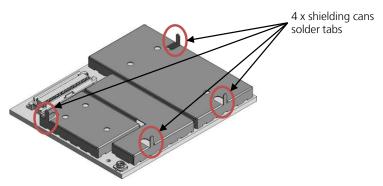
Tabs for Pin-through-Hole (PTH) soldering
